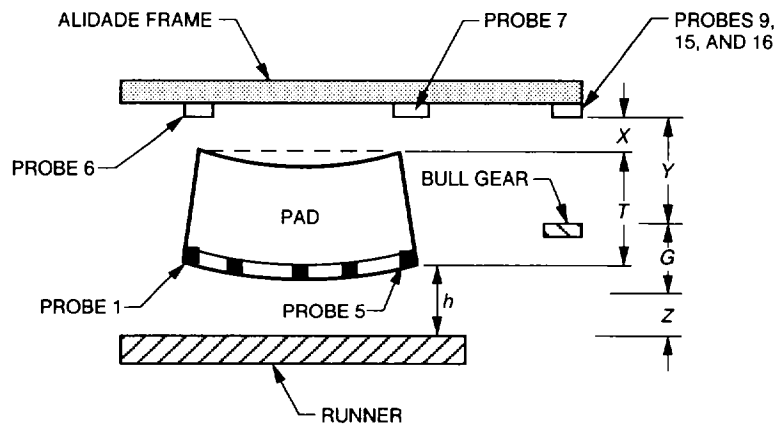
Hydrostatic bearing pad, runner, bull gear, and alidade frame viewed tangentially while facing toward the probe bar on pad 3. The probe bar is assumed to deflect with the pad.
